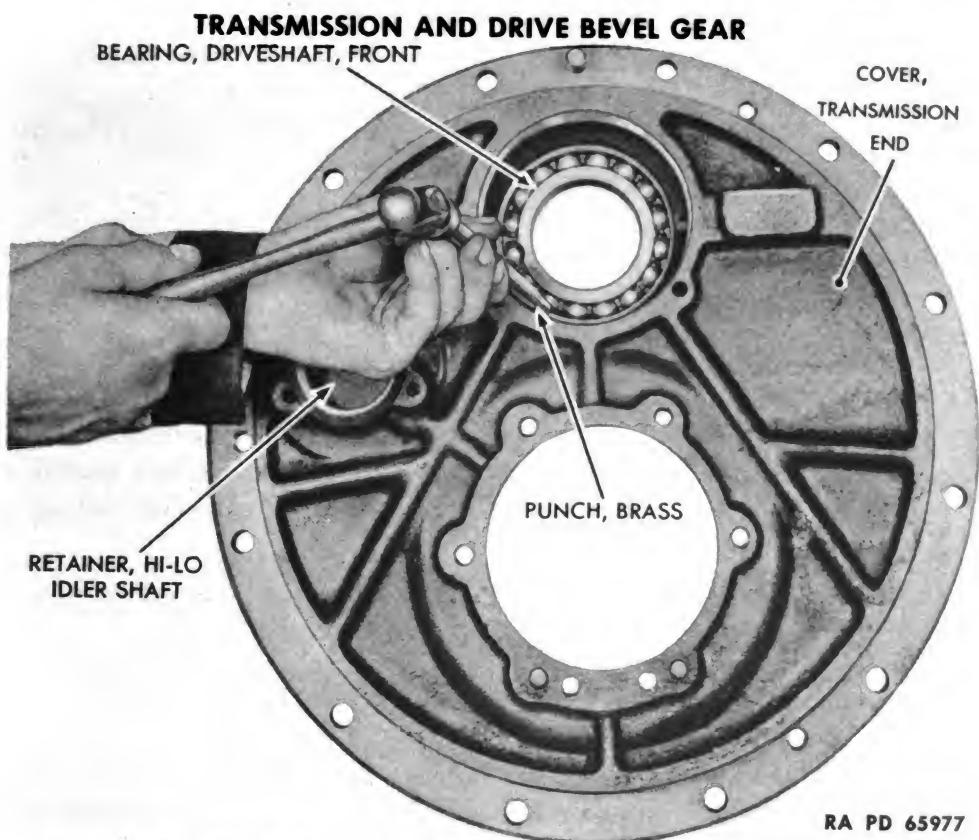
Front Transmission Drive Shaft Bearing Removal
